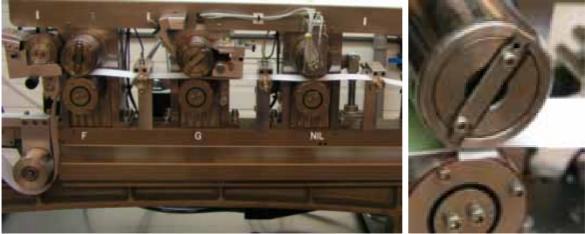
Picture of the roll-to-roll system (left) and closer view of the NIL-unit (right).
